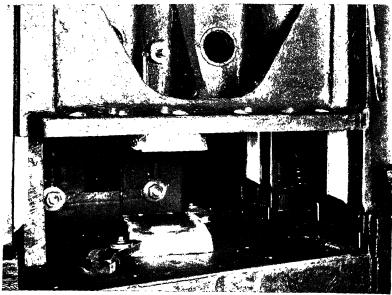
Close-up of the jaws of a coining press showing a set of dies attached. (National Machinery Co.)
